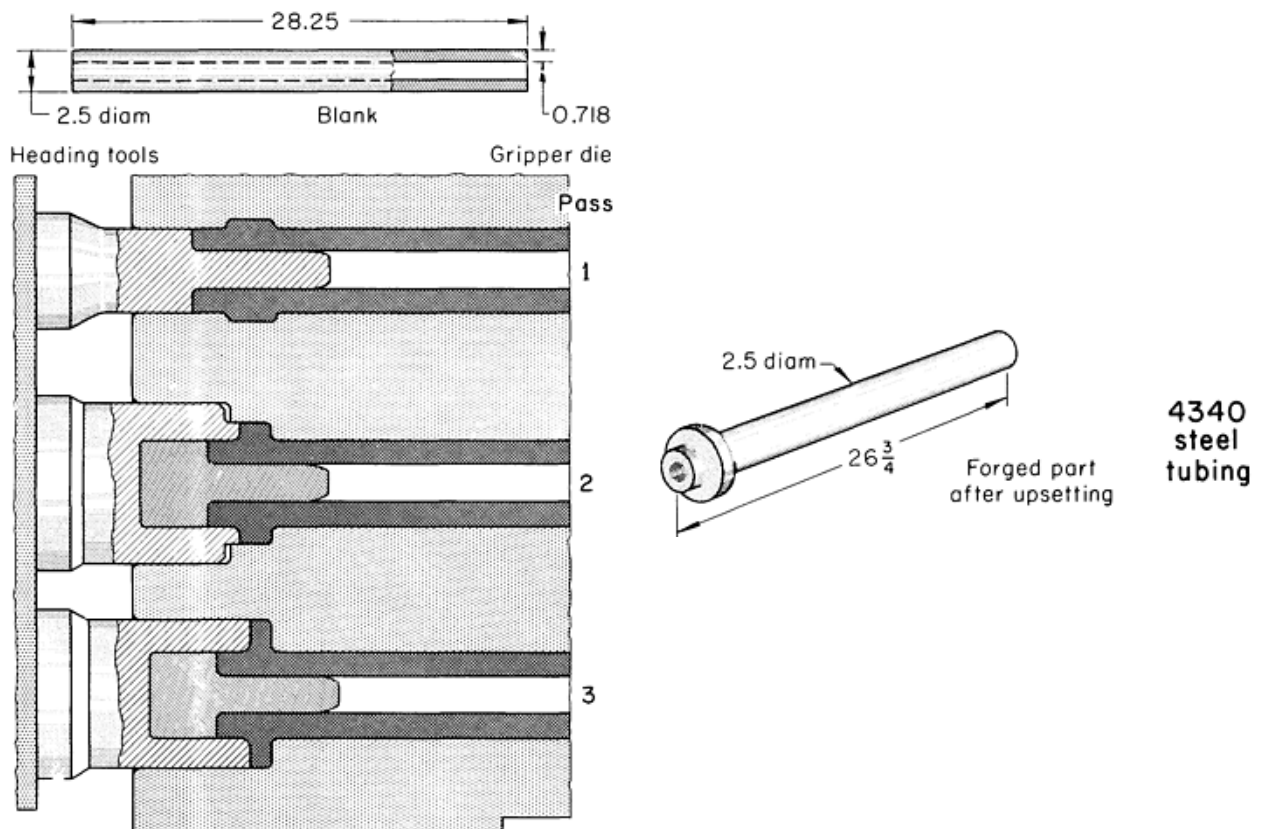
Tooling setup for upsetting a flange a short distance in from the end of a tube. Dimensions given in Inches
